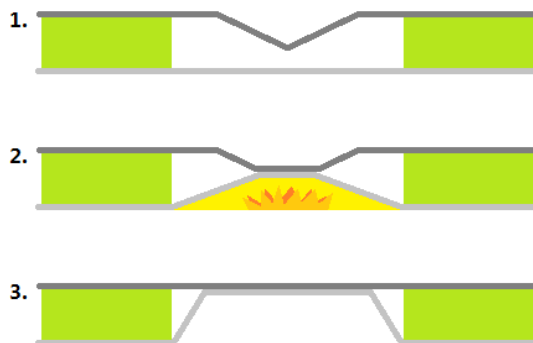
Side-view schematic of welding process using a tent-shape-target (single column).
